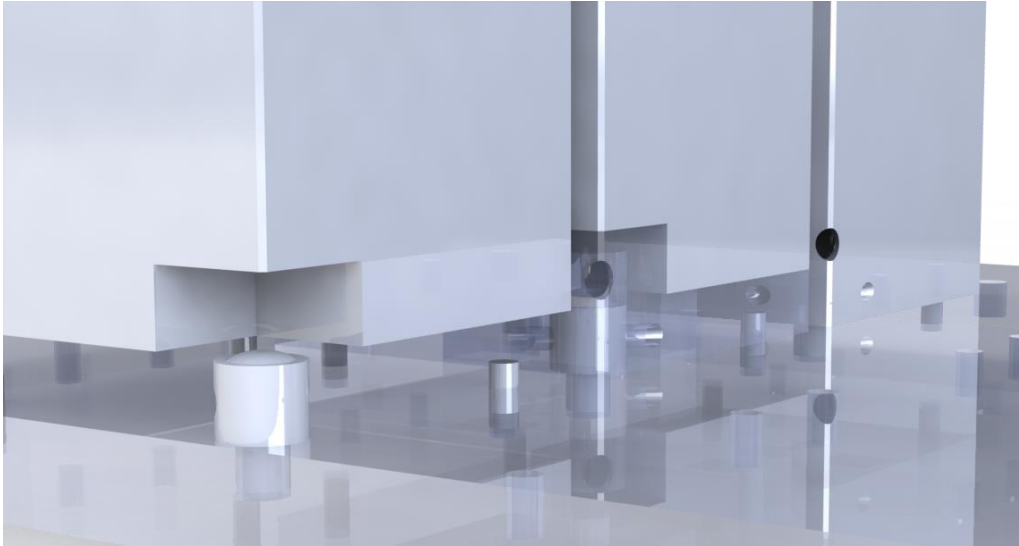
3 Building Blocks, showing the quick detach mechanism. On the right the holes for the Tool and grub screws are visible.
